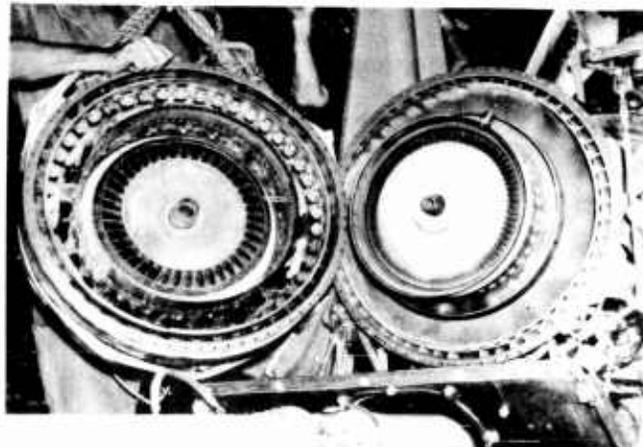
Combustion Chamber (N2 Turbine) Disassembly, Turbine Wheel Rotation Unbalance Test.
